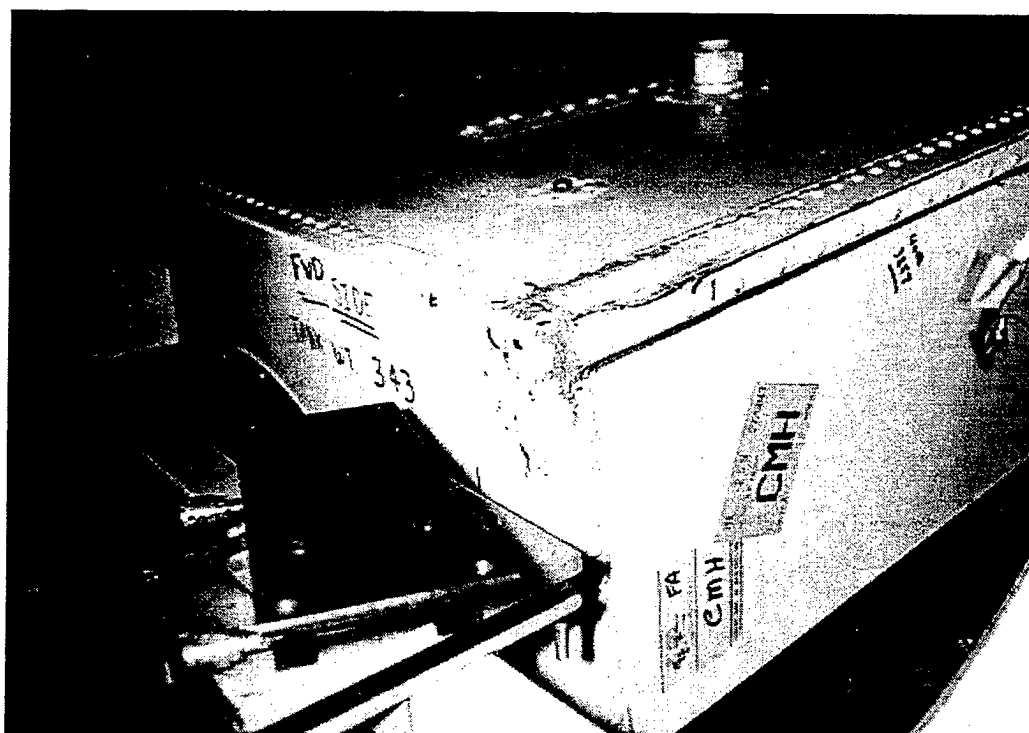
POSTTEST AUXILIARY FUEL TANK FRONT UPPER LEFT CORNER
